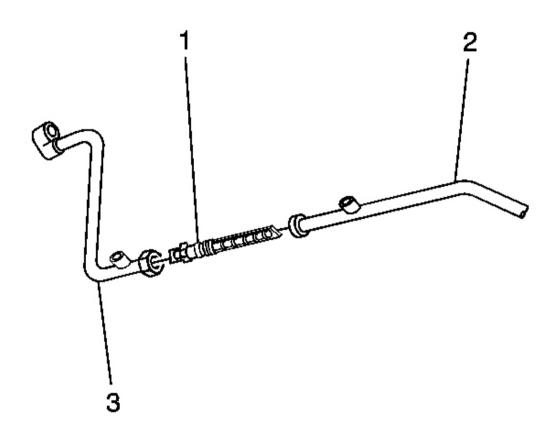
Locating Evaporator Tube Courtesy of GENERAL MOTORS CORP.
